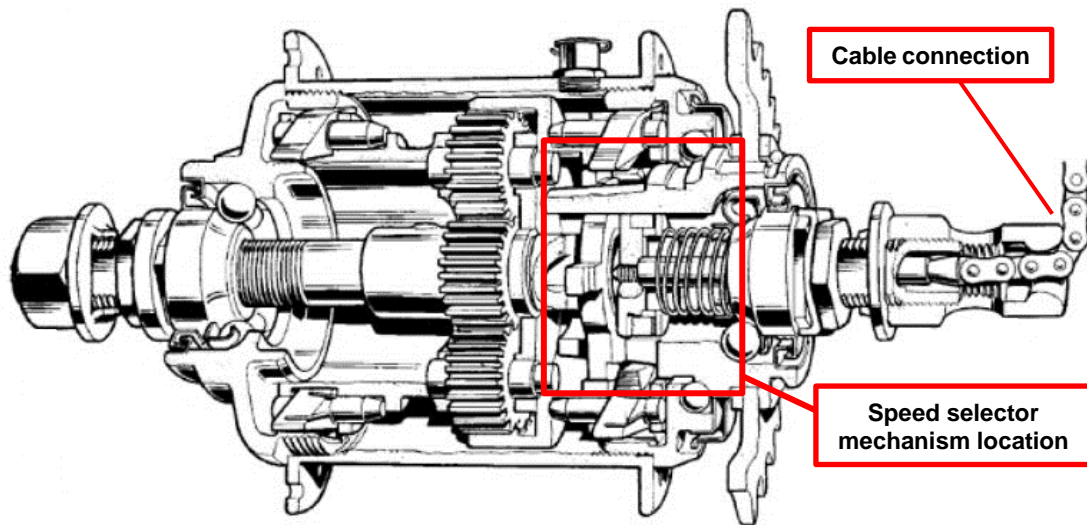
Clutch and speed selection system located inside the clutch mechanism.
